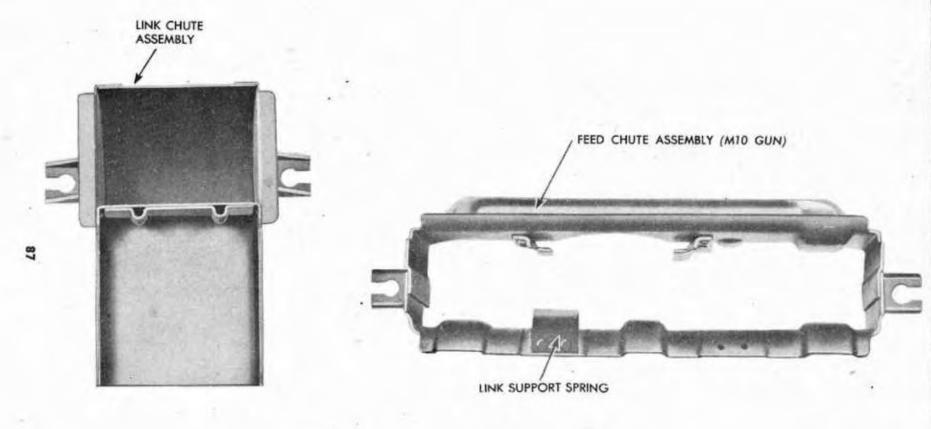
Feed and Link Chute Assemblies (Gun M10)
